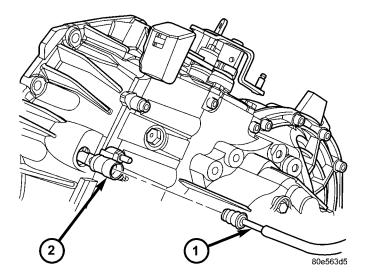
Clutch Slave Cylinder Hydraulic Connection—Diesel and Turbo Models
